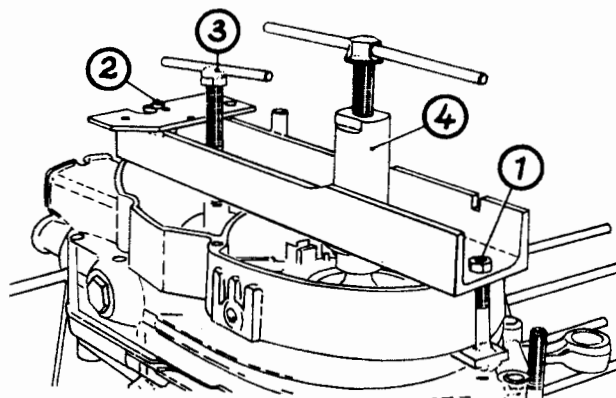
Pulling off the right-hand casing half by means of tool 22-50.420, parts 1 and 8 (4). Properly tighten fastening screws (1) and (2). Uniformly tighten the separating screws (3) and (4).
